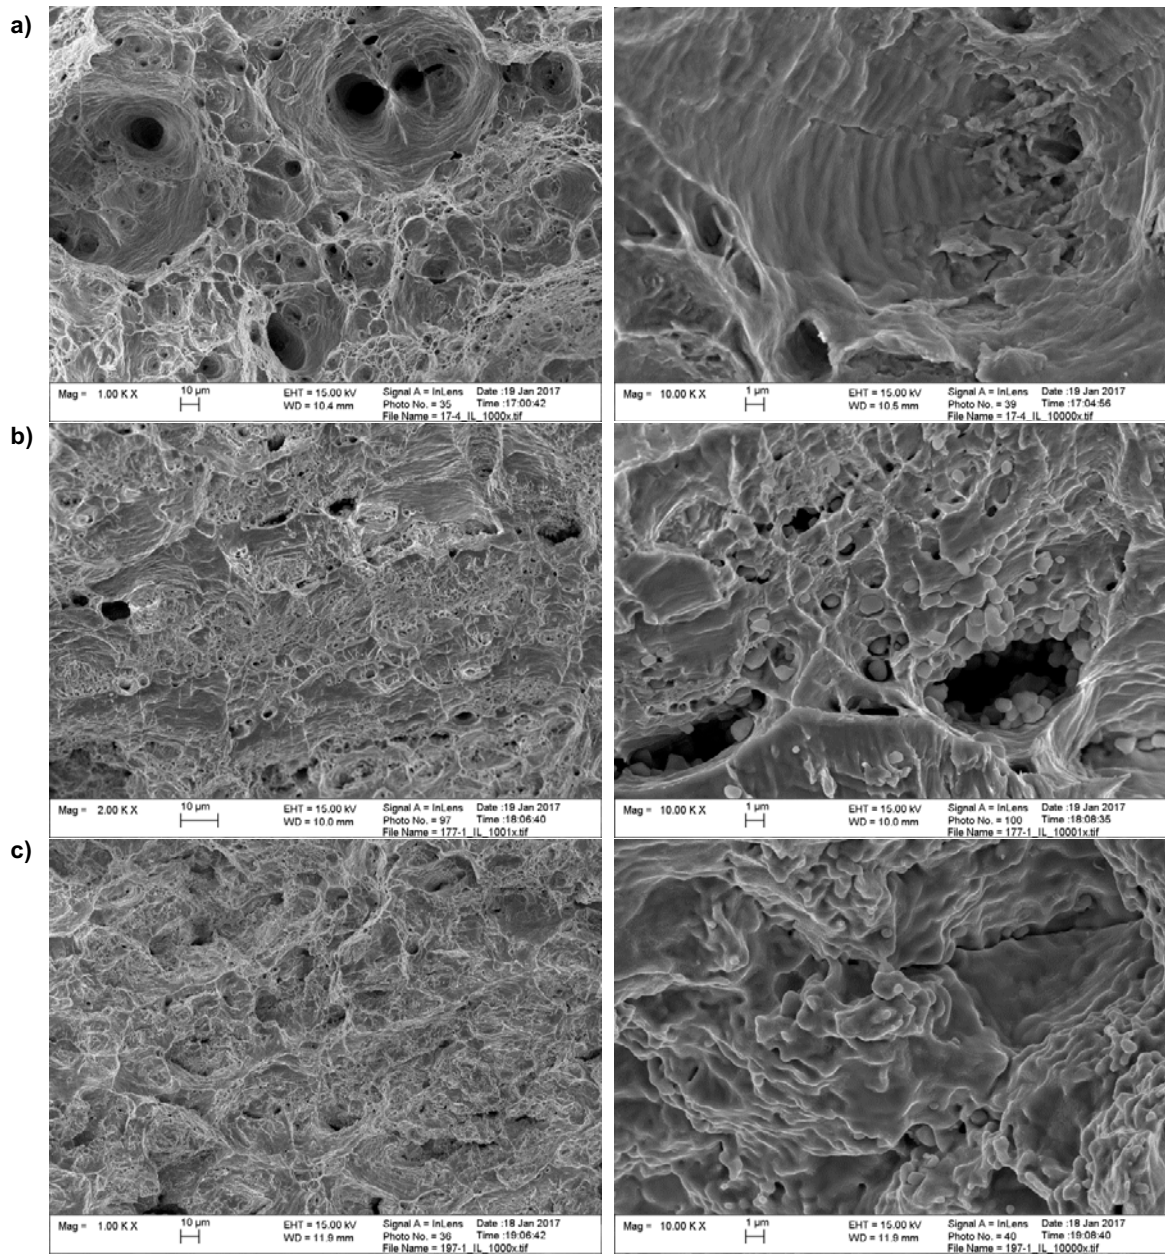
Fracture surfaces of hot tensile specimens. A) reference tested at 75 °C, b) segment 1 (~1 µm) tested at 75 °C and c) segment 1 (~1 µm) tested at 175 °C. The fractographs on the right are with a higher magnification of the same area as the ones on the left.
